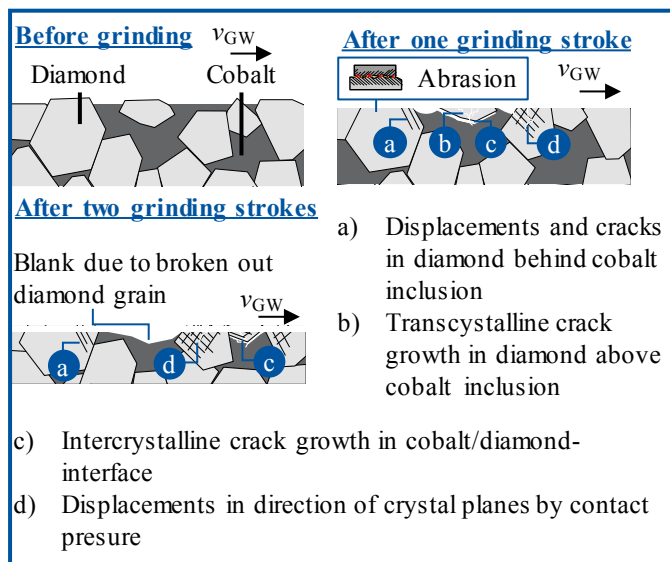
Explanatory model for the material removal mechanisms in PCD-grinding
